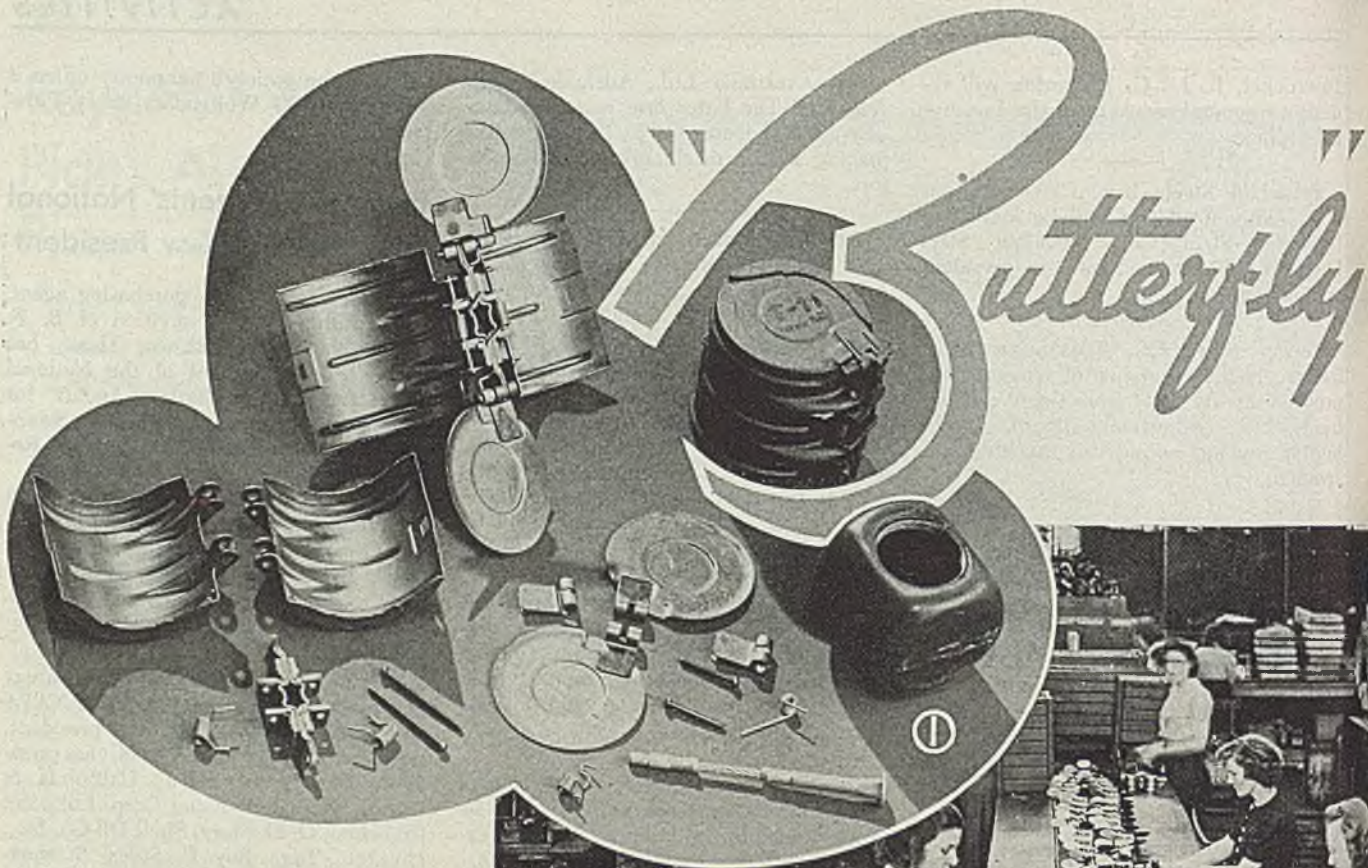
Extreme right, bomb which is filled with explosive; upper right, bomb in case; upper left, open case, note springs and angle of "wings"; foreground, parts making up the assembly
